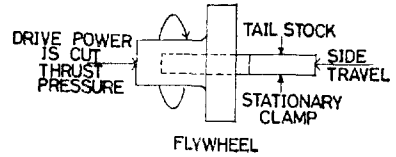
Schematic of inertia friction welding mechanism
